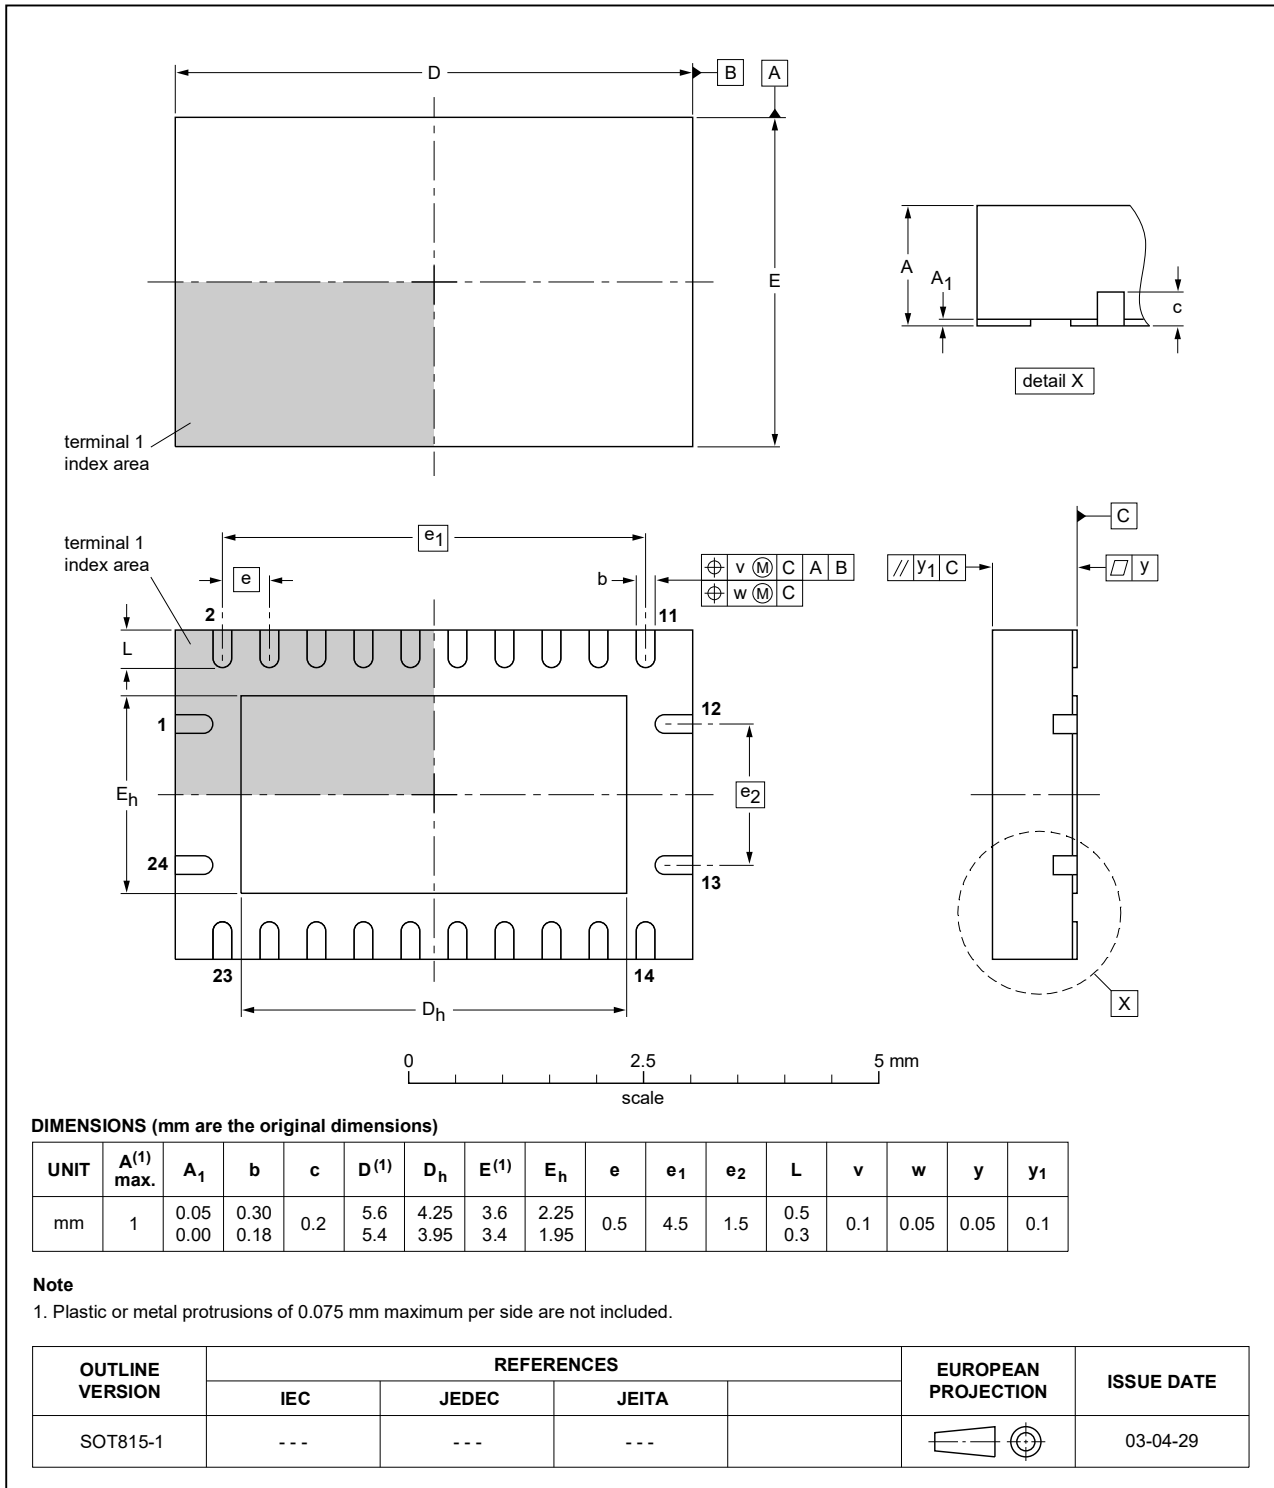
Package outline SOT815-1 (DHVQFN24)
